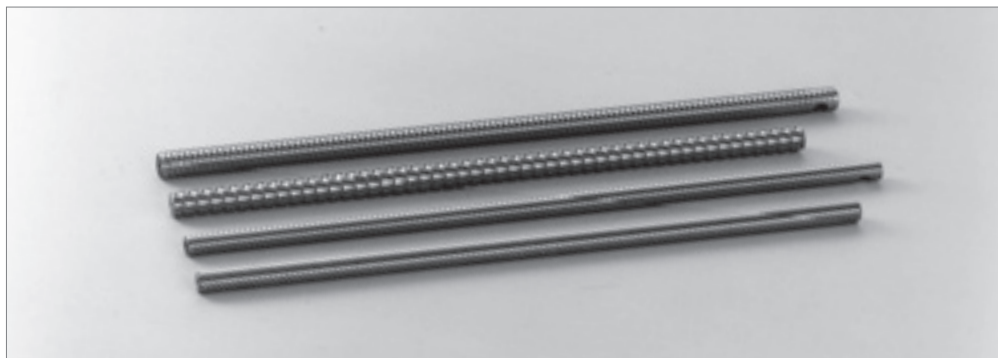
Finished shaft end RMA type and blank shaft end RMS type for transfer equipment
